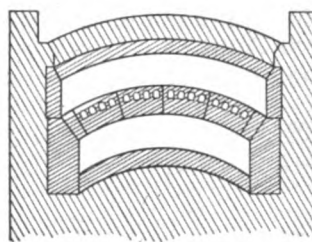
Cross section of earlier type of coal fired, old process patenting furnace.
